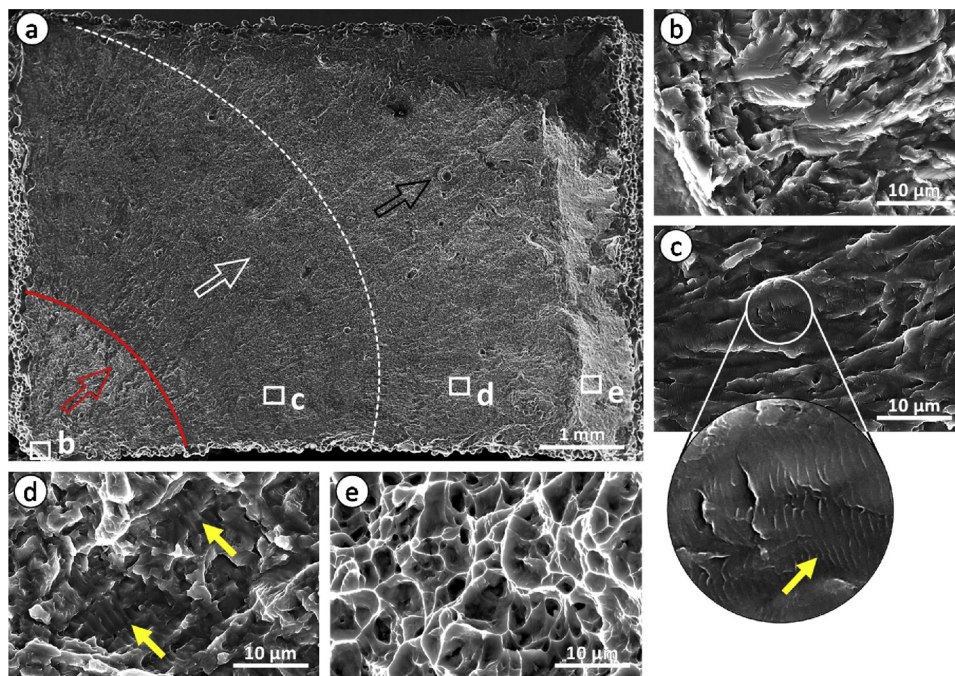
Representative fatigue crack growth stages on the fracture surface of tested specimens.
